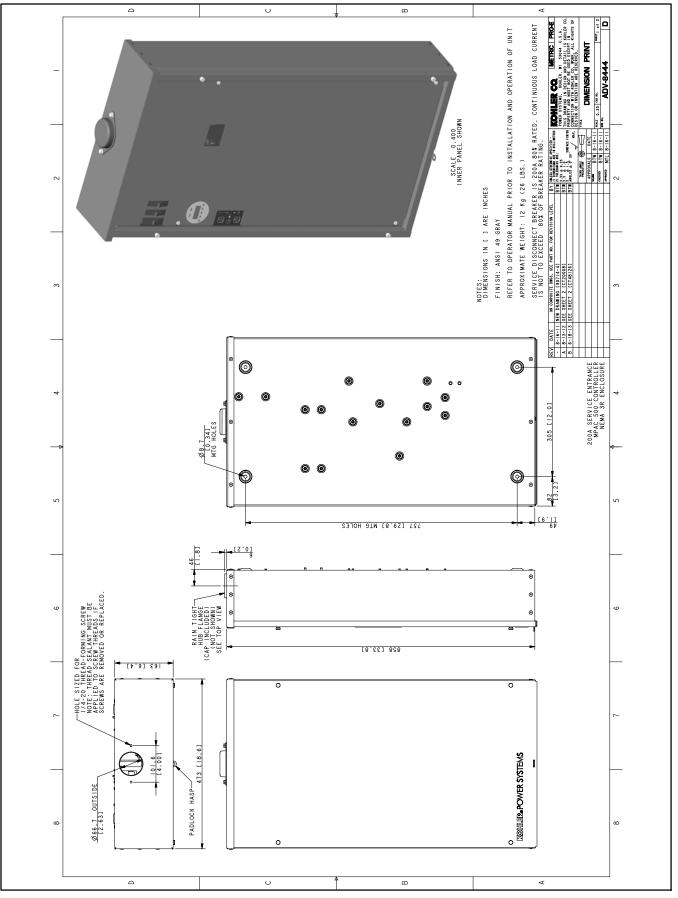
Dimension Drawing, 200 Amp Service Entrance Model, ADV-8444, Sheet 1 of 2
